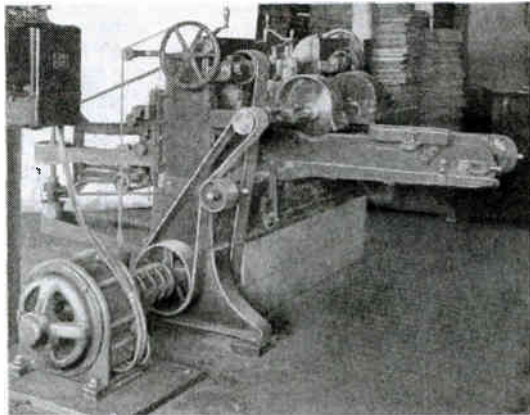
10 H.P. Induction Motor Driving Double End Tenoning Machine
